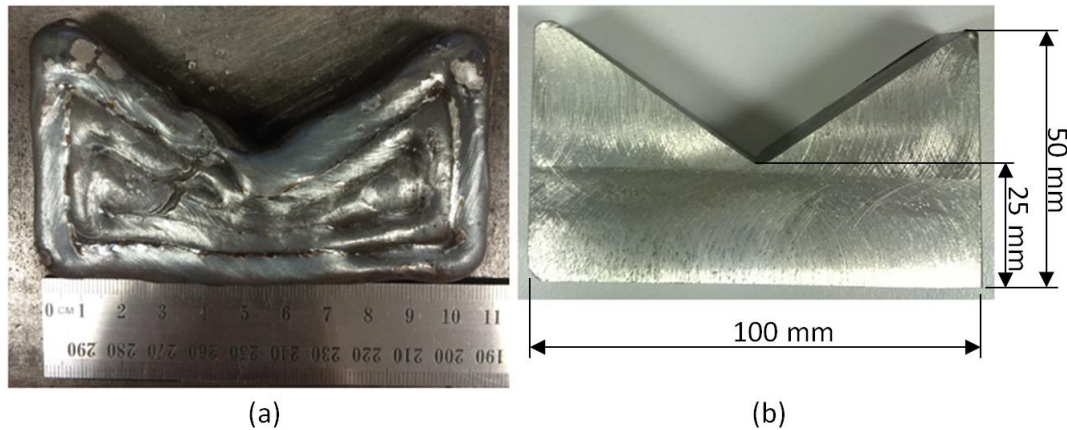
(a) Deposited near-net shape after 15 layers. (b) Finished part without voids after surface milling.
